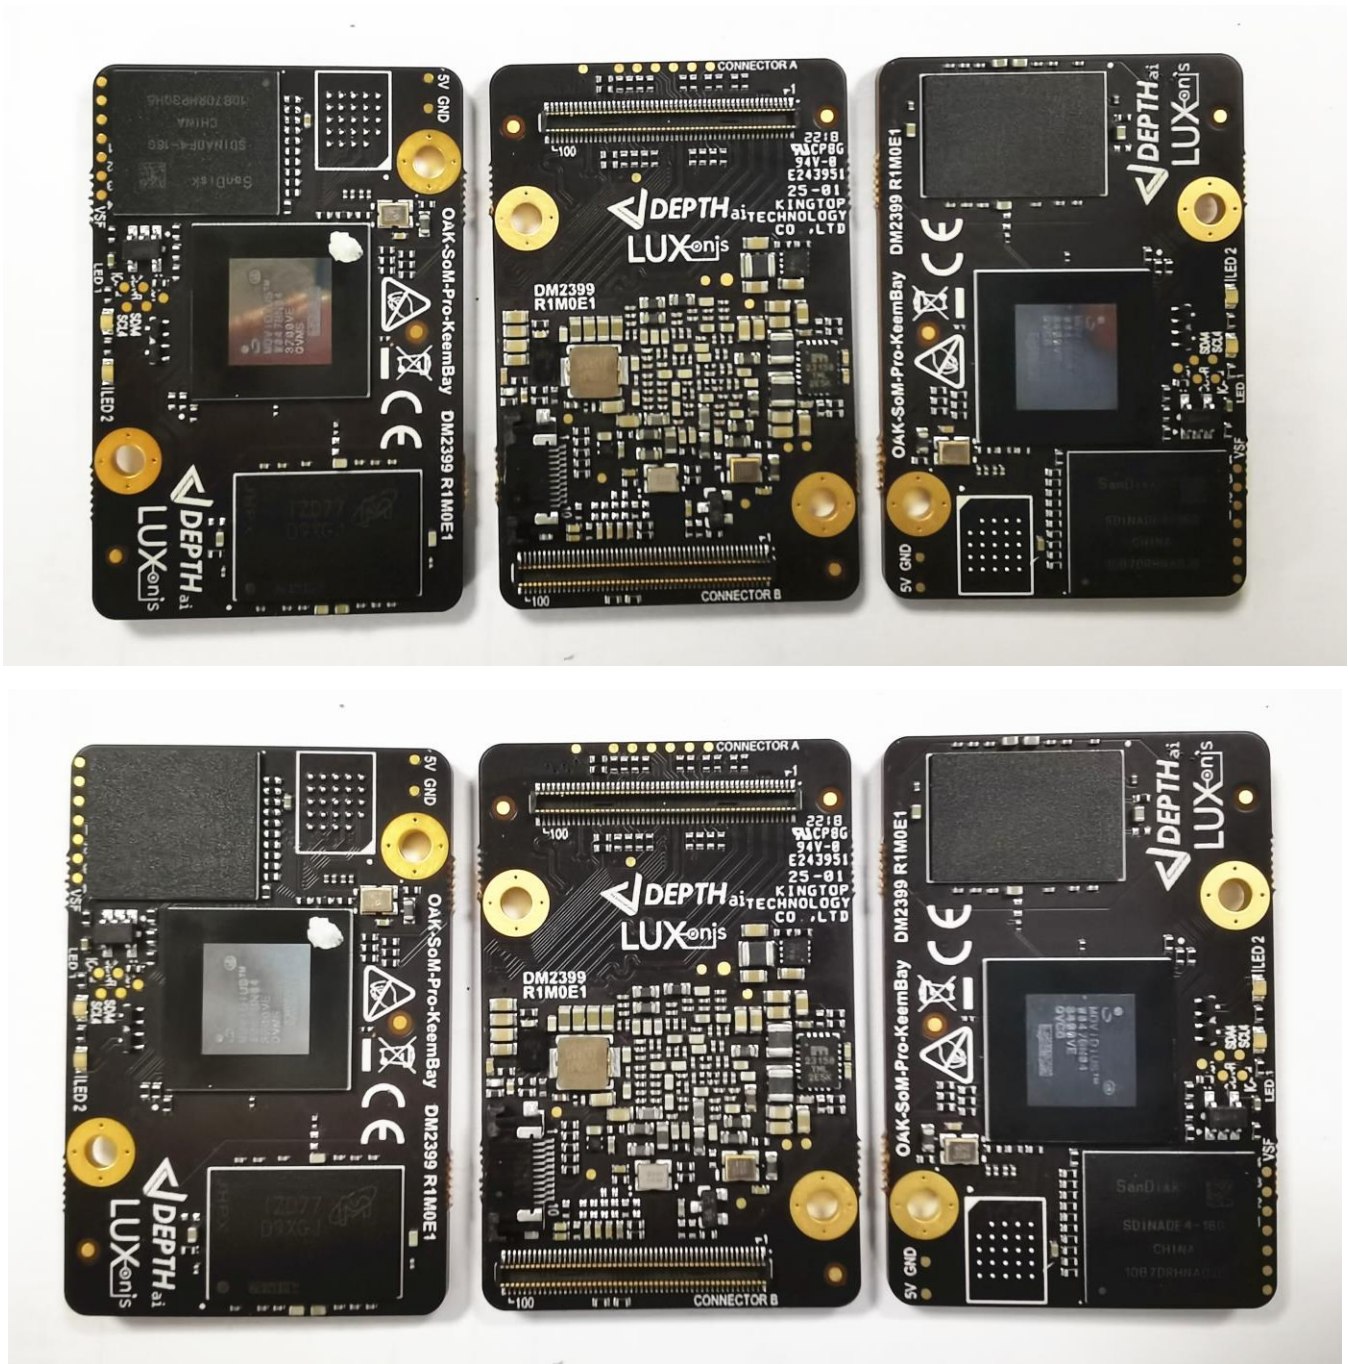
Top and Bottom of OAK-SoM-Pro-S3 PCBA
